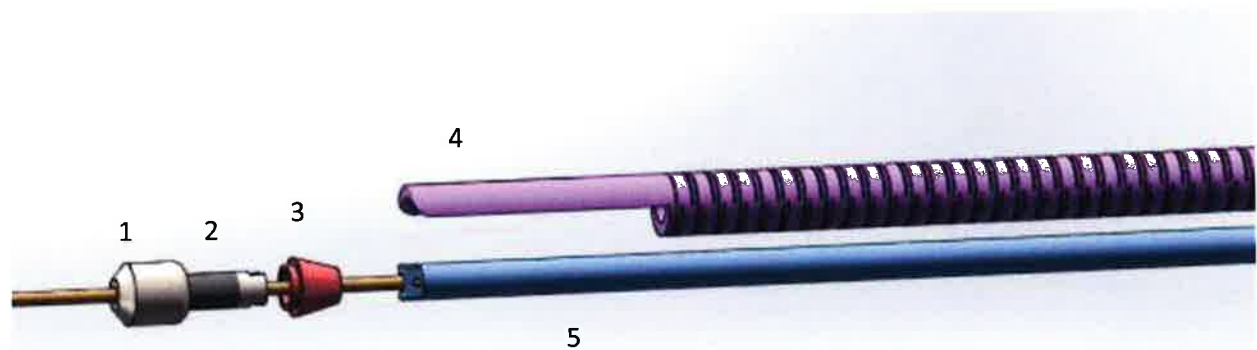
An exploded view of the distal portion of the directional reaming system is shown. Note the Aluminum grit blasted region (2) on the reamer cutting head (1) as well as the peek conical bearing with the added stainless steel shim (3) to separate the bearing from the cutting flutes of the reamer head. The flexible follower sleeve (4) is shown above the reamer shaft (5) which contains a spiral cut to induce flexibility (not shown).
